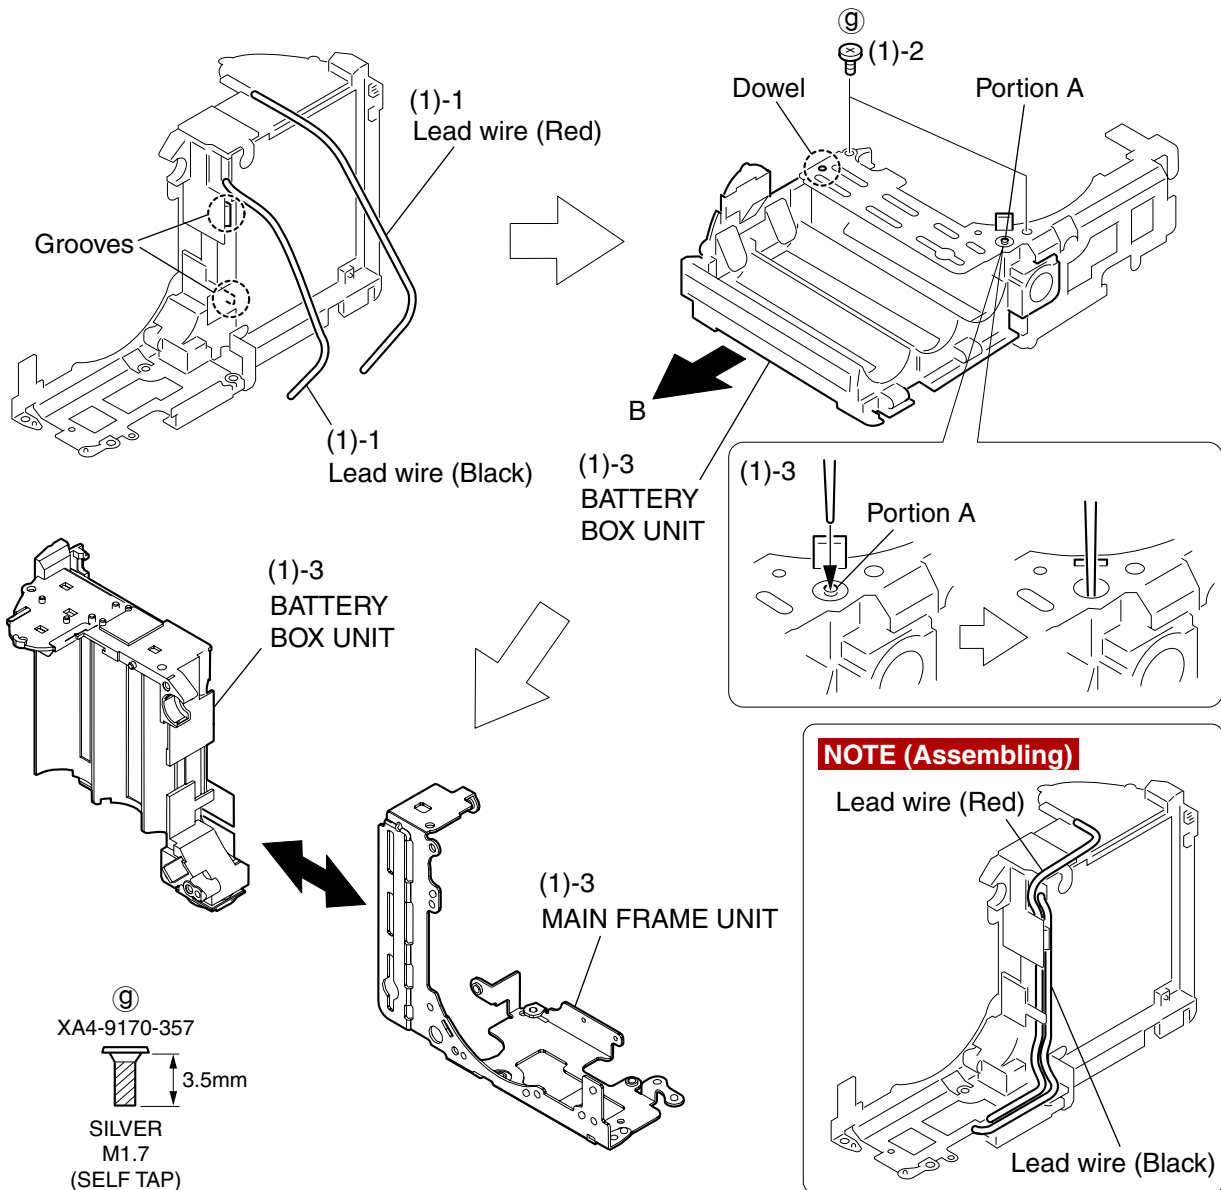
BATTERY BOX UNIT, MAIN FRAME UNIT
